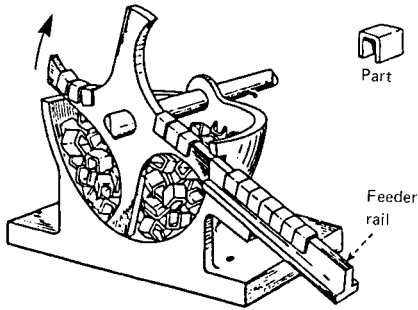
Rotary centerboard feeder. Blade, with edge shaped to match part, rotates through parts, catching those oriented correctly. Parts slide on contour of blade to exit onto feeder rail.
